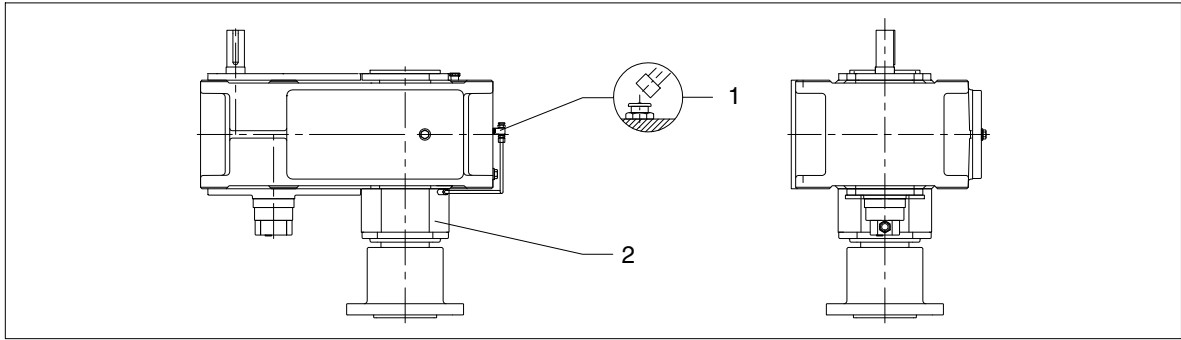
Lubricating point for lower output-shaft bearing of type H.BV with oil-dam pipe (see item 5.7.5)
